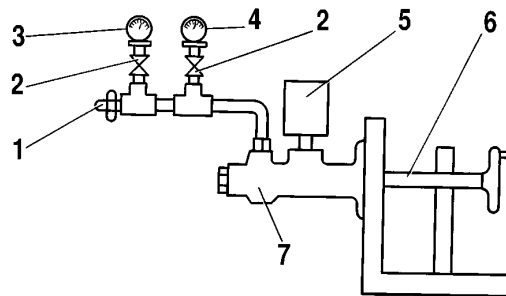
Checking the leak-proofness of the front sealing ring:
